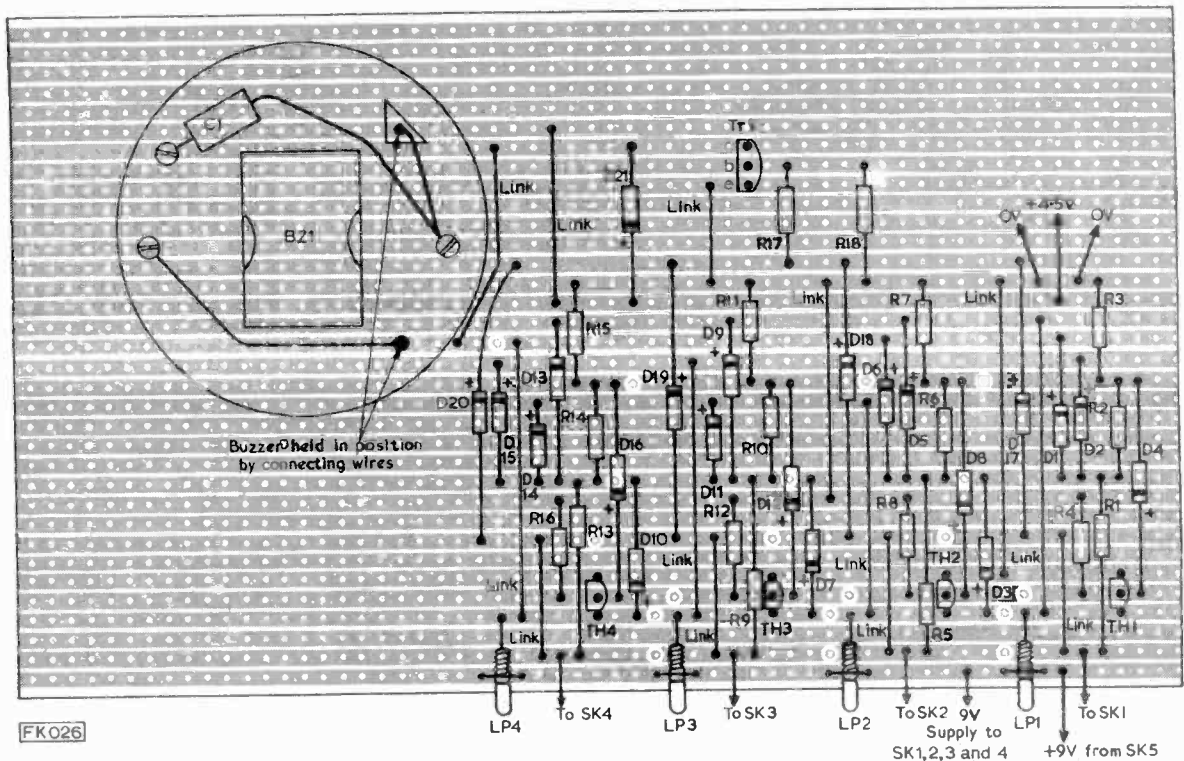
Component layout on circuit board. Note carefully the breaks in the copper rails.
